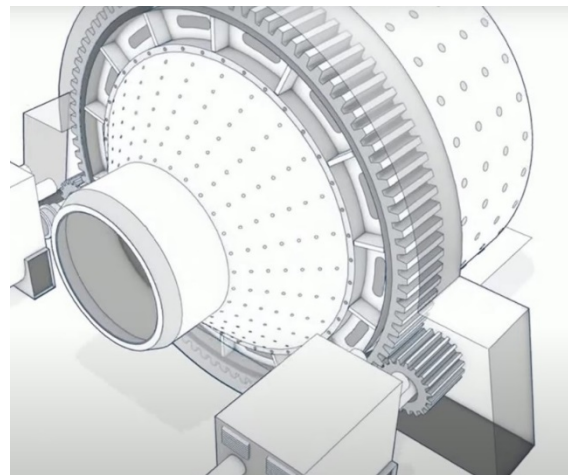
Ball drum mill drive (scale 1:1000) [1]
